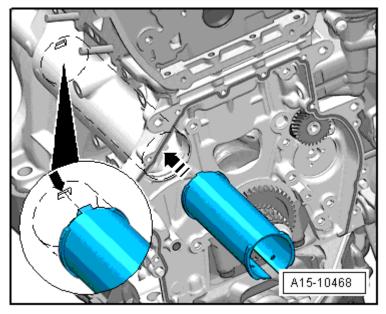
Identifying Pipe For Balance Shaft - Installation Position Courtesy of VOLKSWAGEN UNITED STATES, INC.
